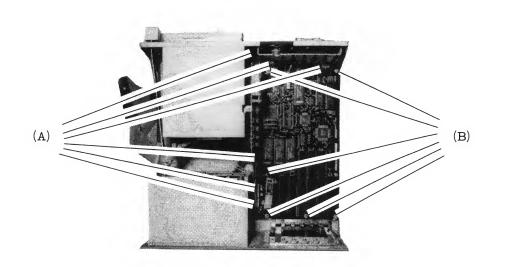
MAIN CONTROL BOARD (ANDRO BOARD) REMOVAL/REPLACEMENT
